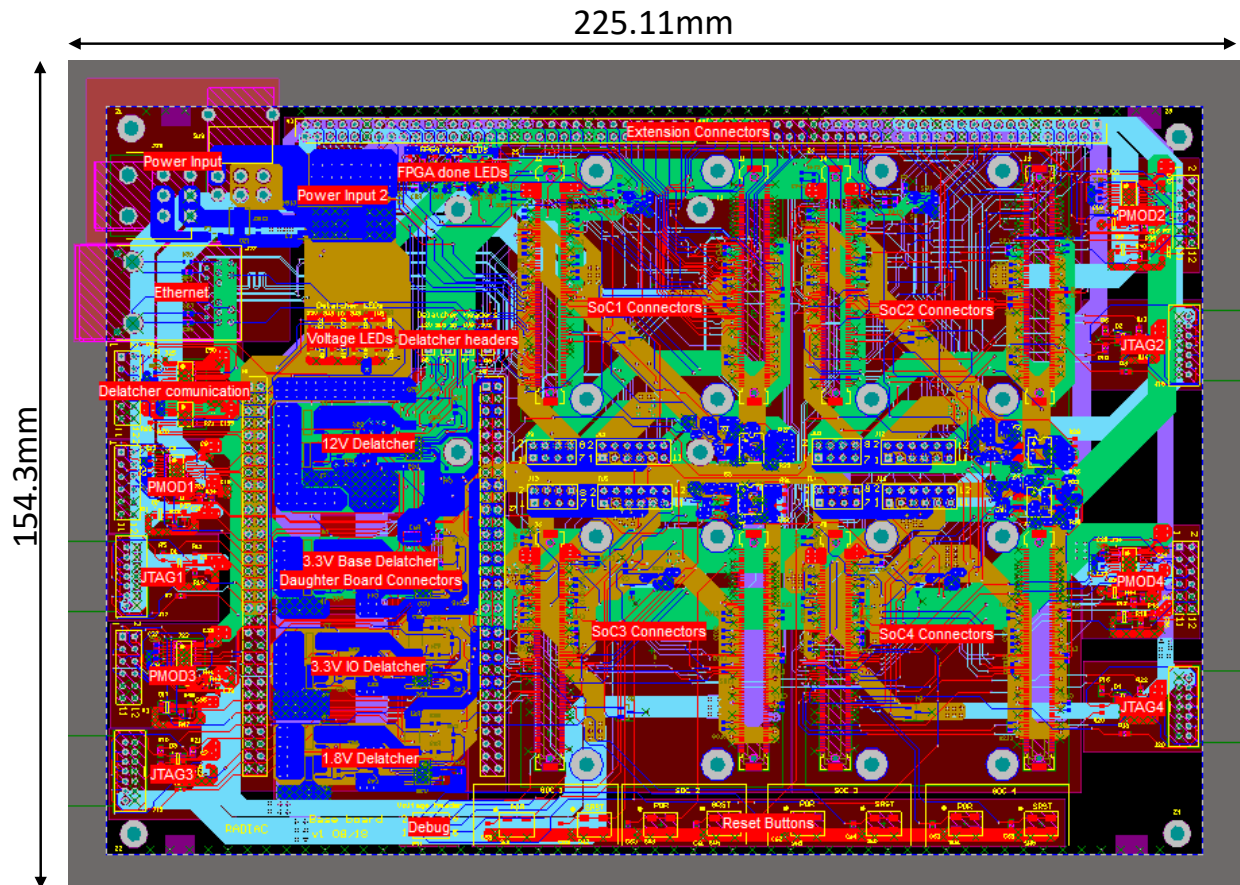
8-layer PCB layout of the custom-designed CB
